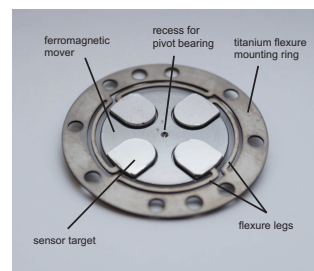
Integrated mover with flexure. The bottom side of the ferromagnetic mover with the recess for the pivot bearing and the titanium flexure is shown. Aluminium targets for the eddy current sensors are also depicted.
